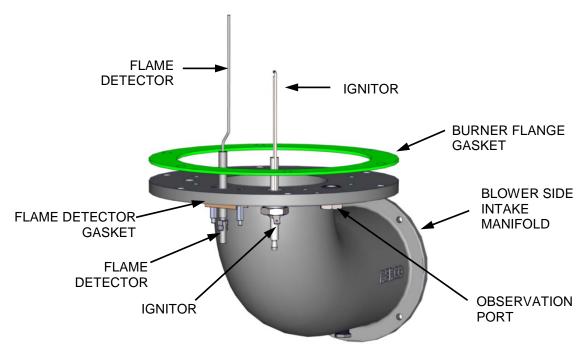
Blower-Side Intake Manifold (Shown removed from Heater)
